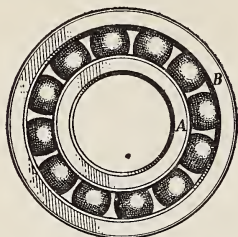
a*.—Ball bearing. *A*, inner race which fits on axle. *B*, outer race, which fits inside hub.
